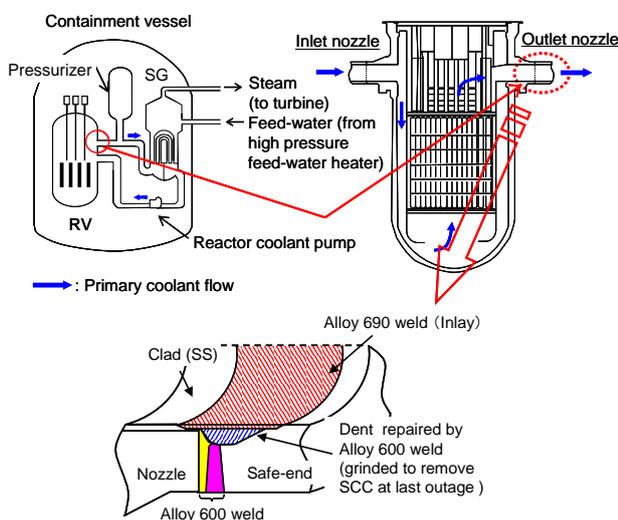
Repair method of Ohi-3 RV nozzle weld
